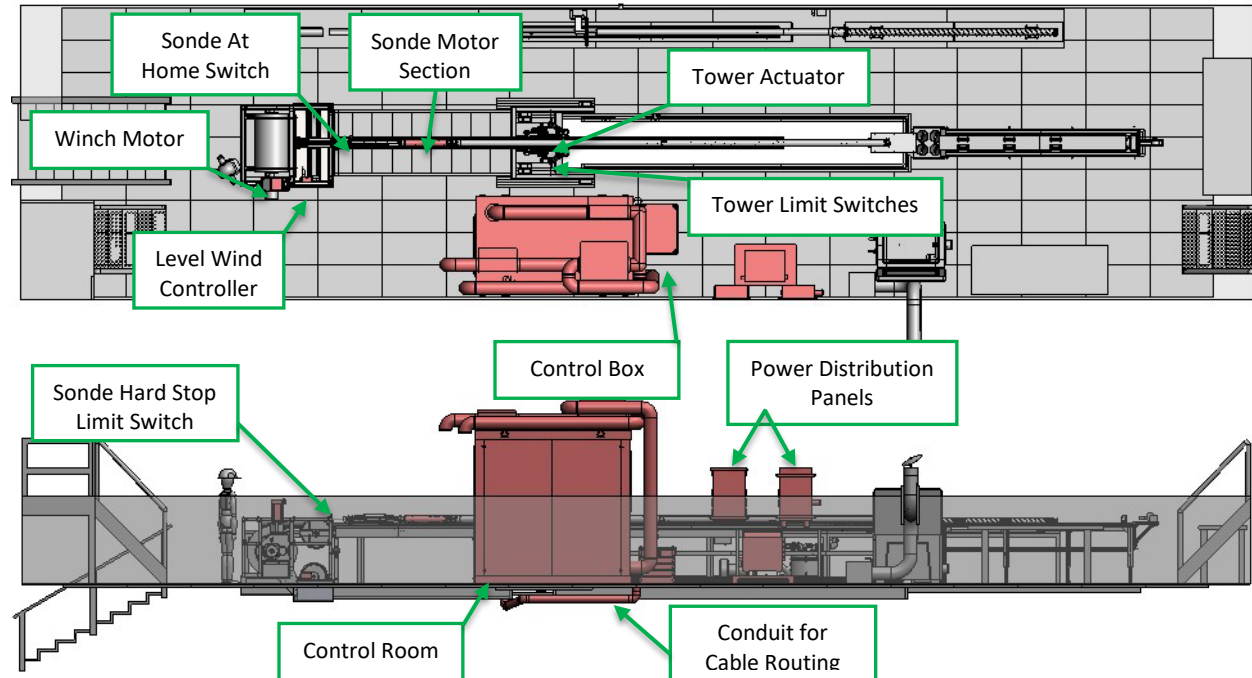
Foro 3000 control system layout, top view and side view with the major components labeled.
